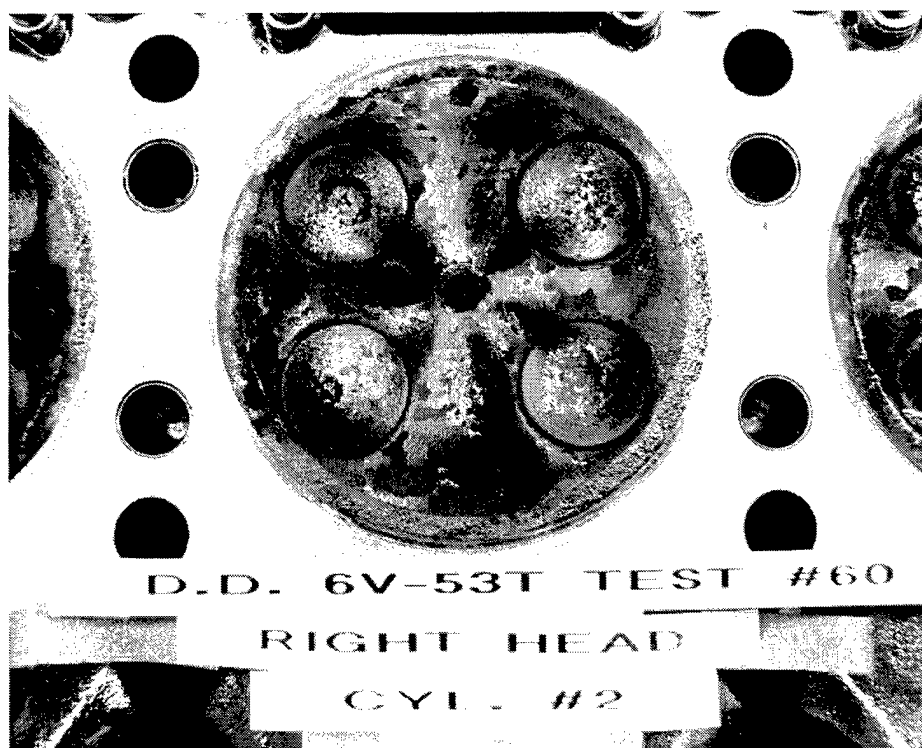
6V53T Test 60, Right Head, Cylinder No. 2
